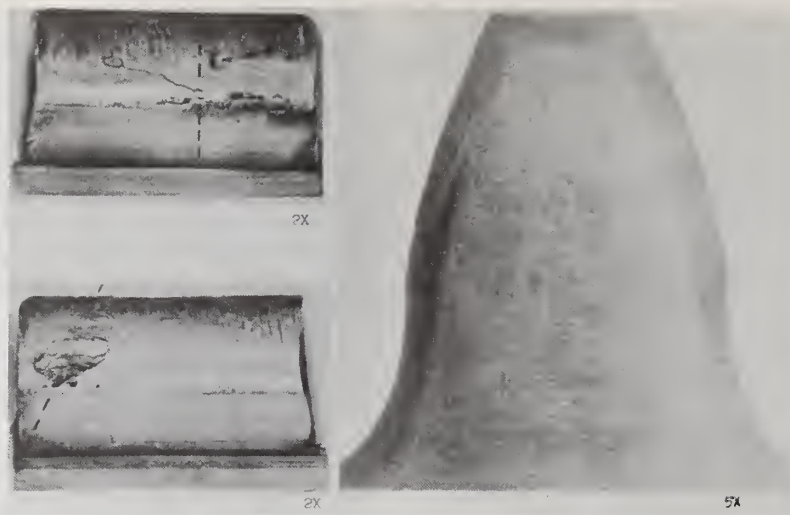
V-shaped surface pit on gear tooth showing angle of crack propagation.
